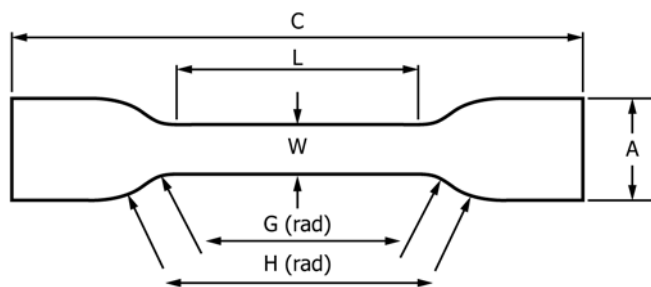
Tensile Dumbbell Specimen Dimension Key
